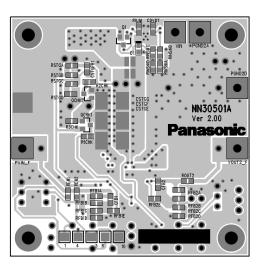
Bottom Layer with silk screen (Bottom View)
